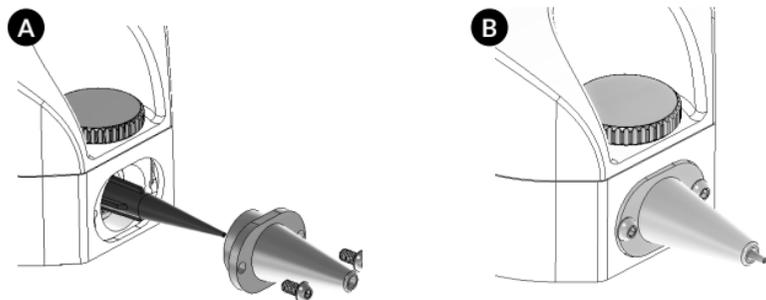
Attaching the nozzle/needle insulator to the Temperature-controlled Printhead.
